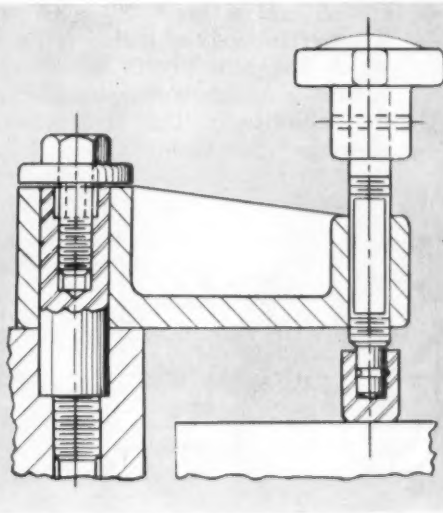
Clamping arrangement in which knob and shoe screw equipped swinging arm is pivoted on two-diameter stud.
